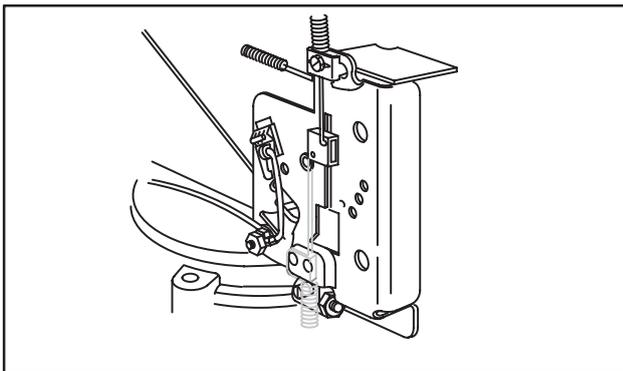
170000, 190000, 220000, 250000, 280000, except 286700, Vertical Rack & Pinion Control for Briggs & Stratton One Piece Flo-Jet Carburetors
